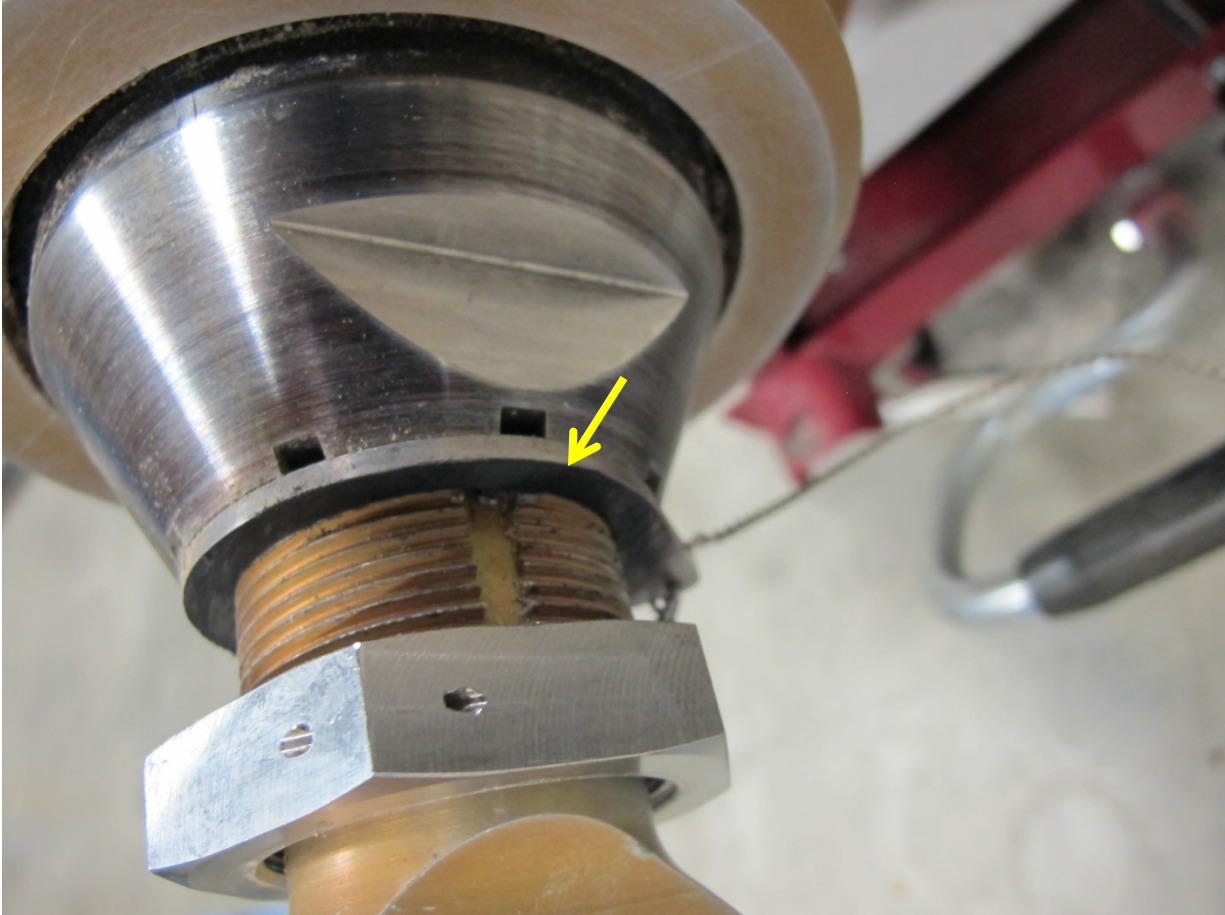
Displacement of the reluctor key(yellow arrow) with RH rod end groove
